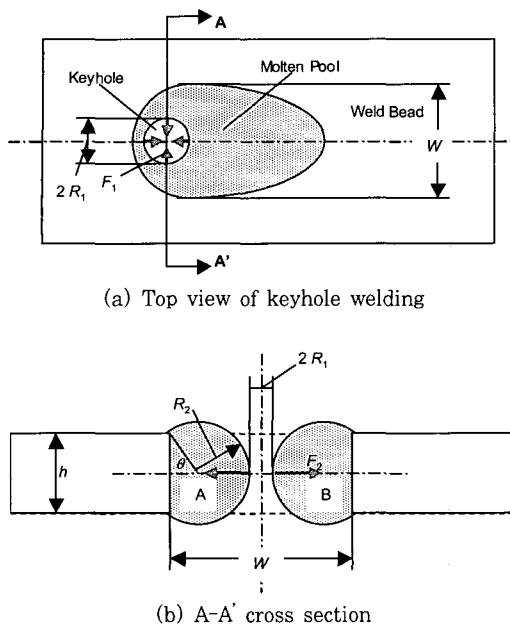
Bridging condition of liquid droplets in keyhole welding
